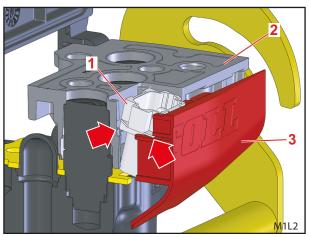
Installing the Hydro-Fix lower part – Electric plug connector and cover
